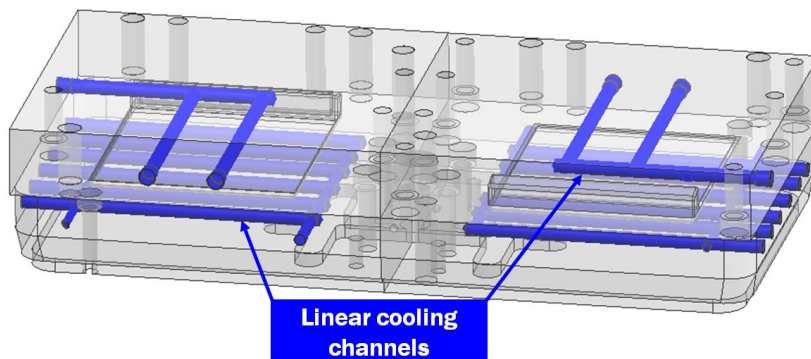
Cooling channel design of the initial mould for the flat plate with a partly large volume
